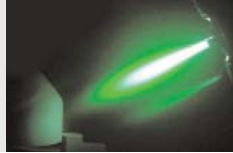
Segmented powder nozzle for buildup welding in difficult positions
